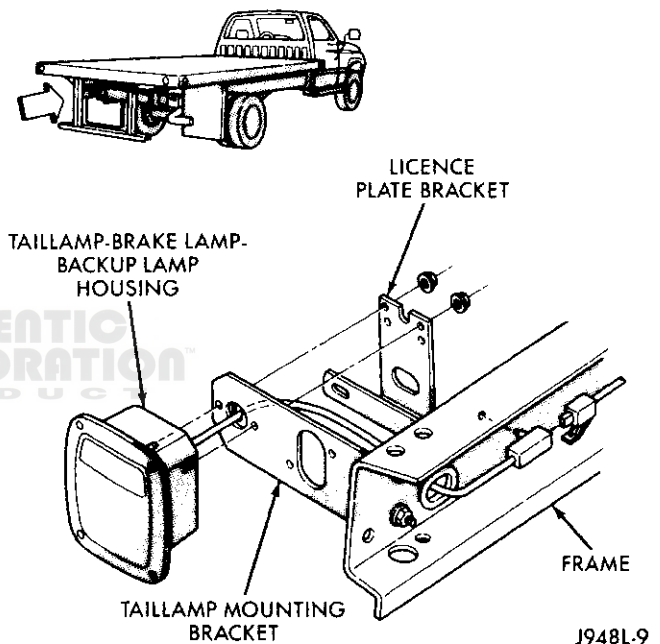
Tail, Stop, Turn Signal and Back-up Lamps—Cab Chassis
